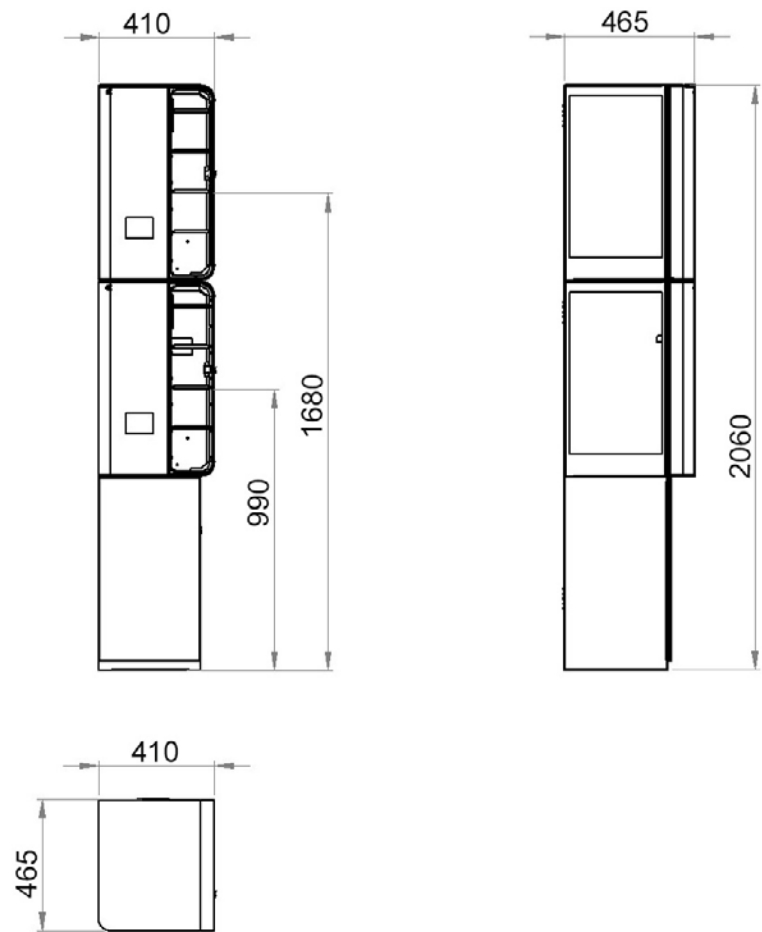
IN/OUT TwinDeck, dimensions in mm
